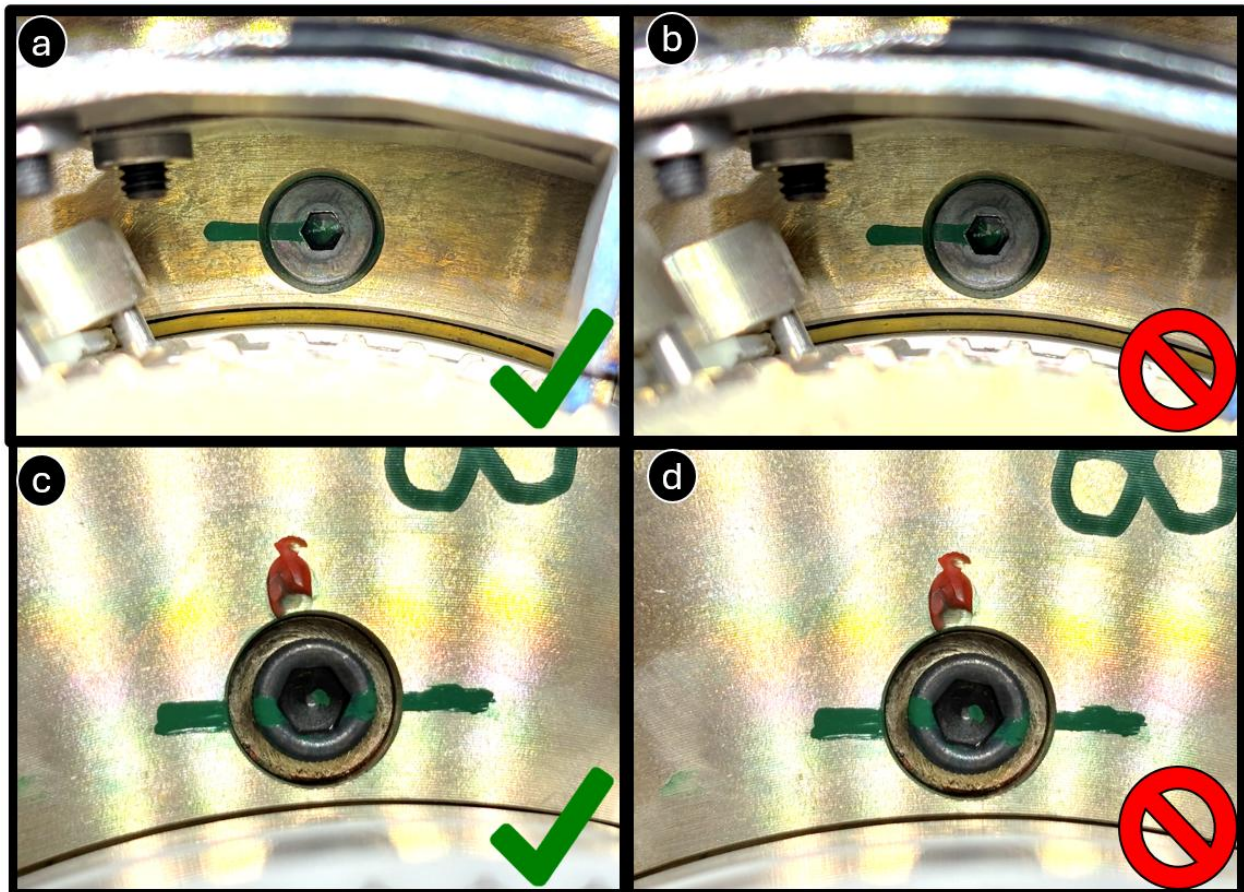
Examples of No Rotation (a) & (c) and rotation (b) & (d) post torque inspection
